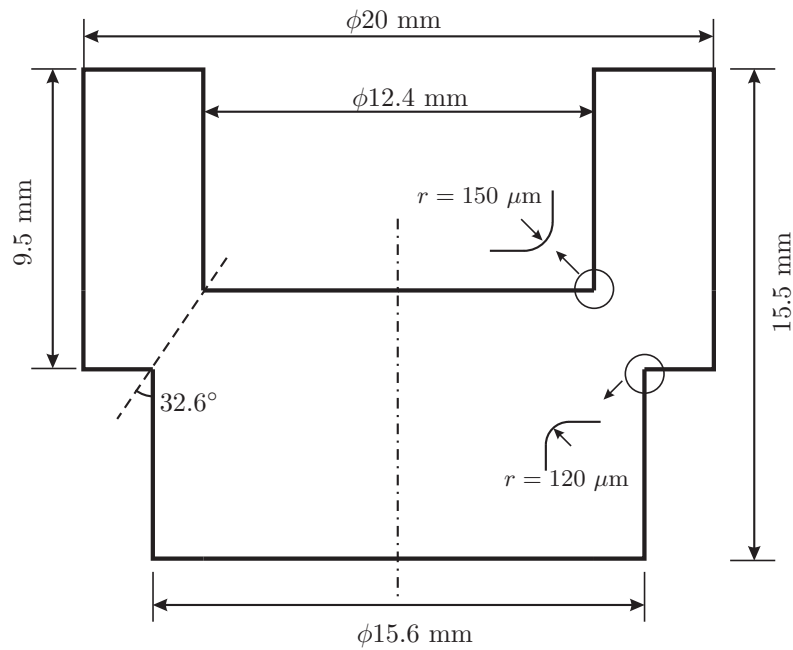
Geometrical shape and size of the modified axisymmetric hat specimen.
